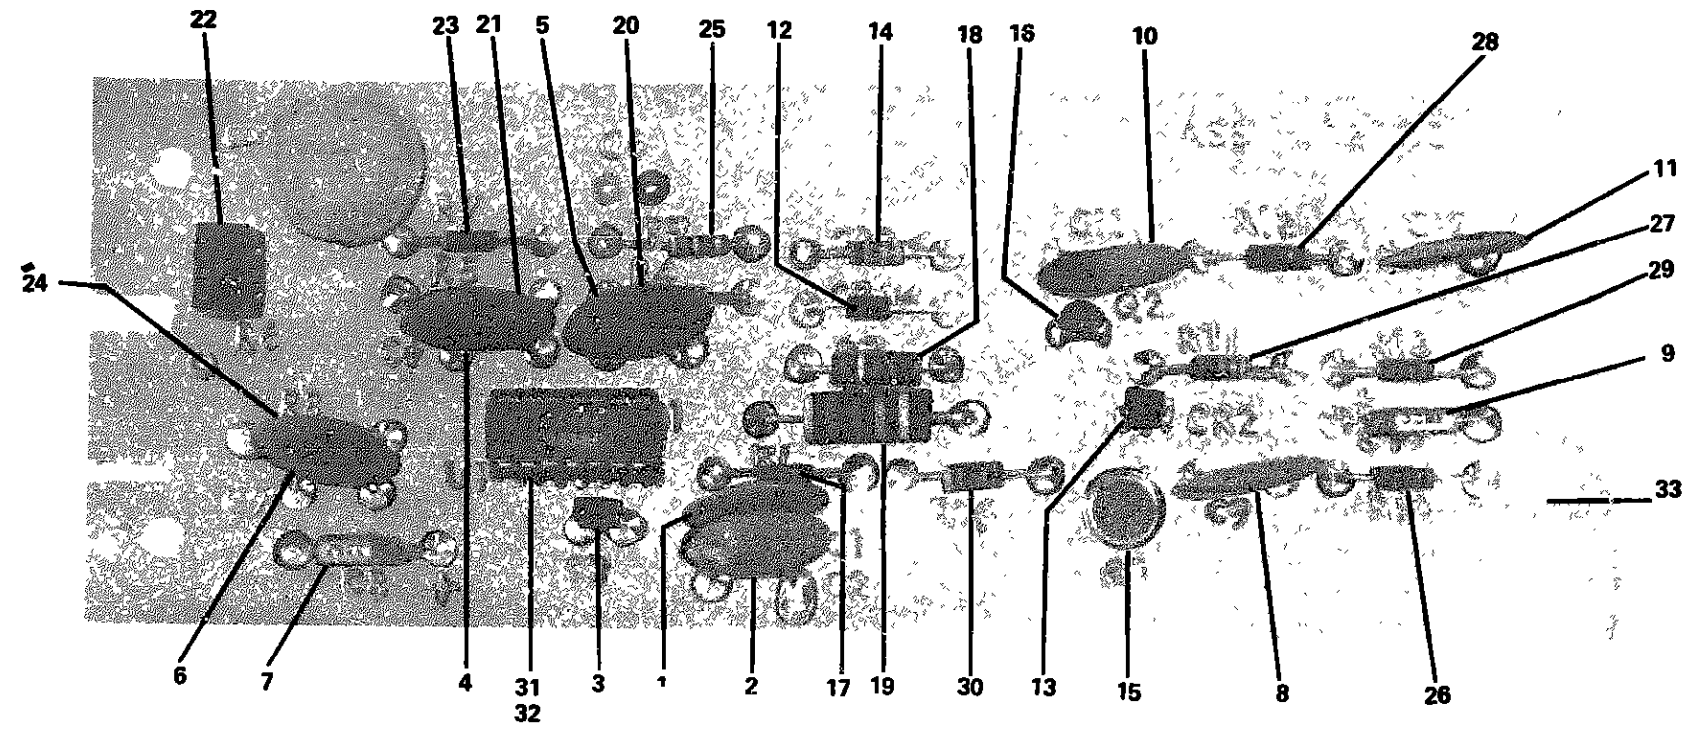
Regulator Card Assembly +5 Volt Power Supply
